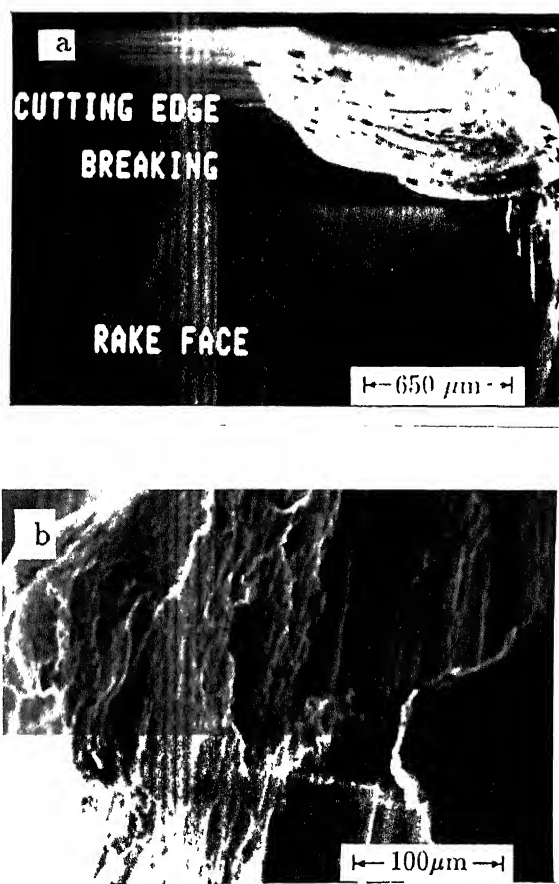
SEM pictures of tool made of alloy C after cutting test, showing : (a) cutting edge breaking, and (b) magnified view of the broken surface.
